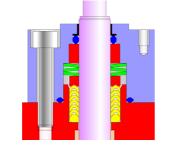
Series BR 23 Stainless Steel Rotary Plug Valve
